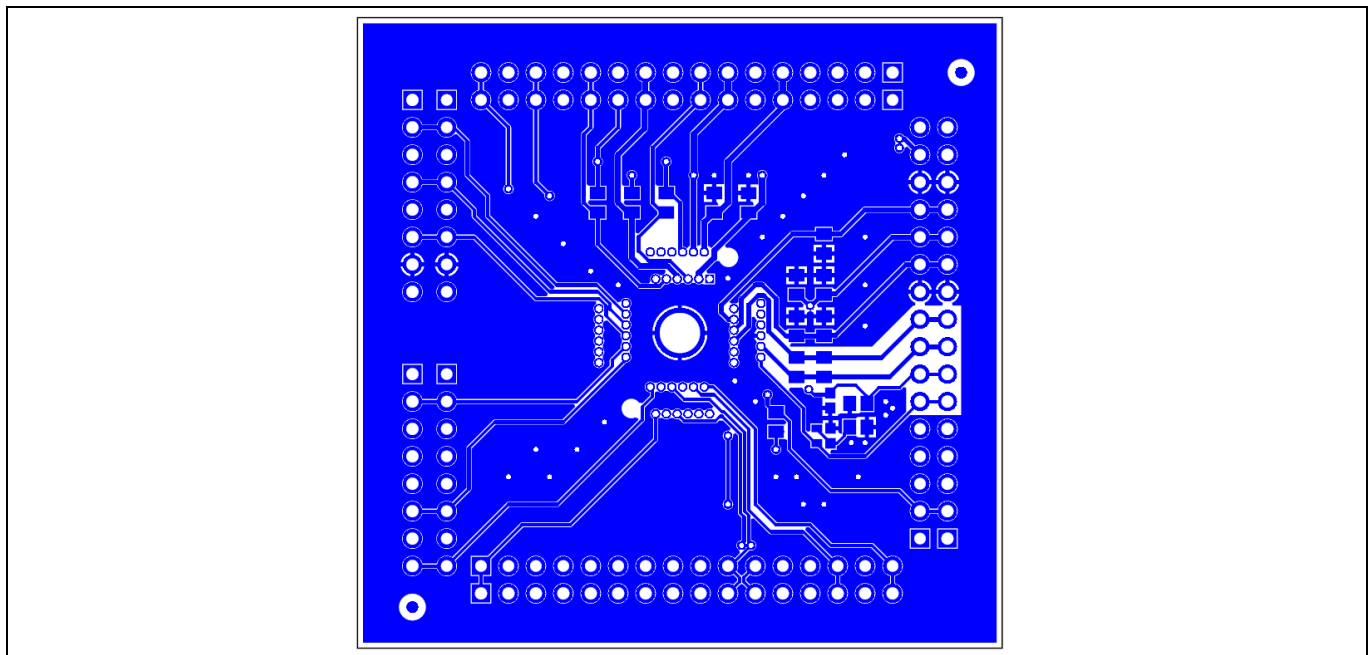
TLE988x\_TLE989x TQFP48 Socketboard, Bottom layer
